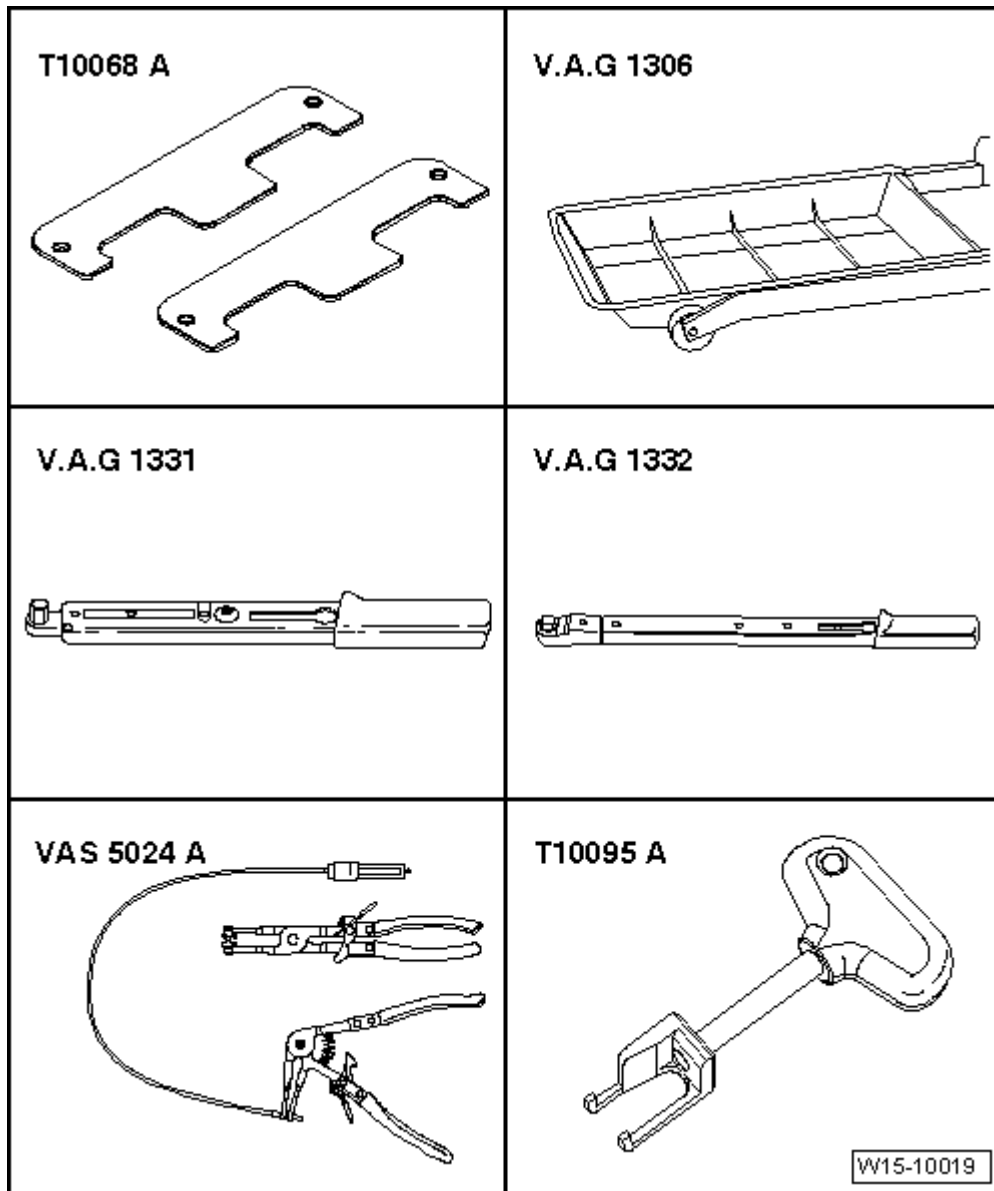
Identifying Special Tools -- Cylinder Head, Removing And Installing
